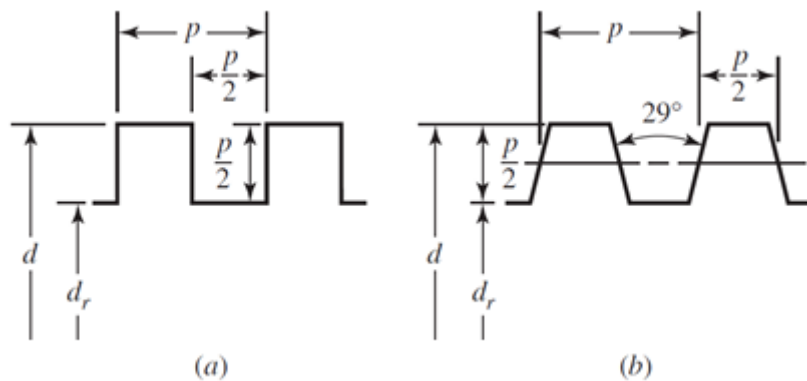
types of threads (a) Square thread; (b) Acme thread.
